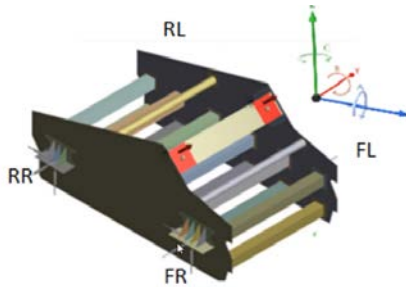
Hammer Impact Modal Test of the Processing Equipment
